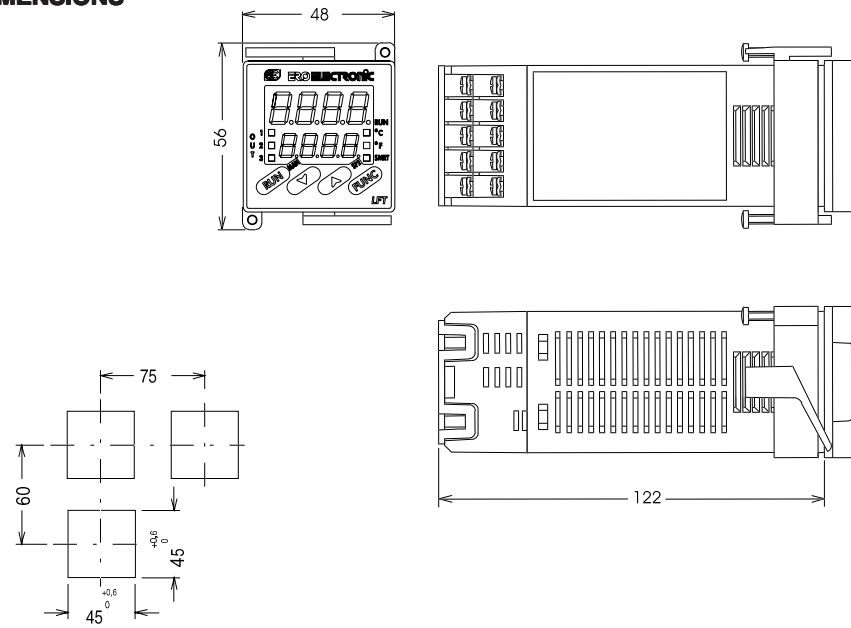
OUTLINE AND CUT-OUT DIMENSIONS
